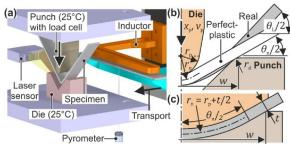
Heat assisted bending: (a) set-up (b) air-bending (c) die-bending.
